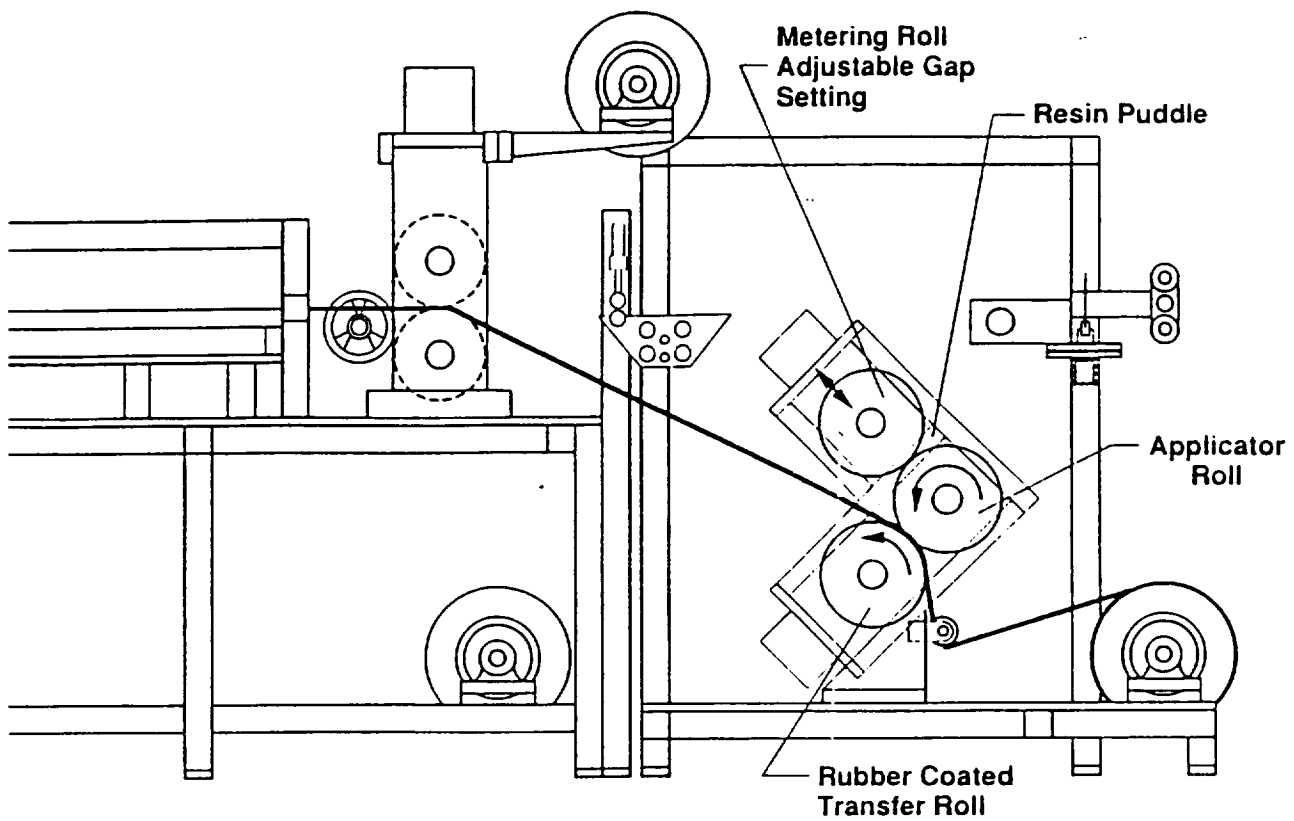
The Film Coating Process Using the Reverse Roll Coater.
